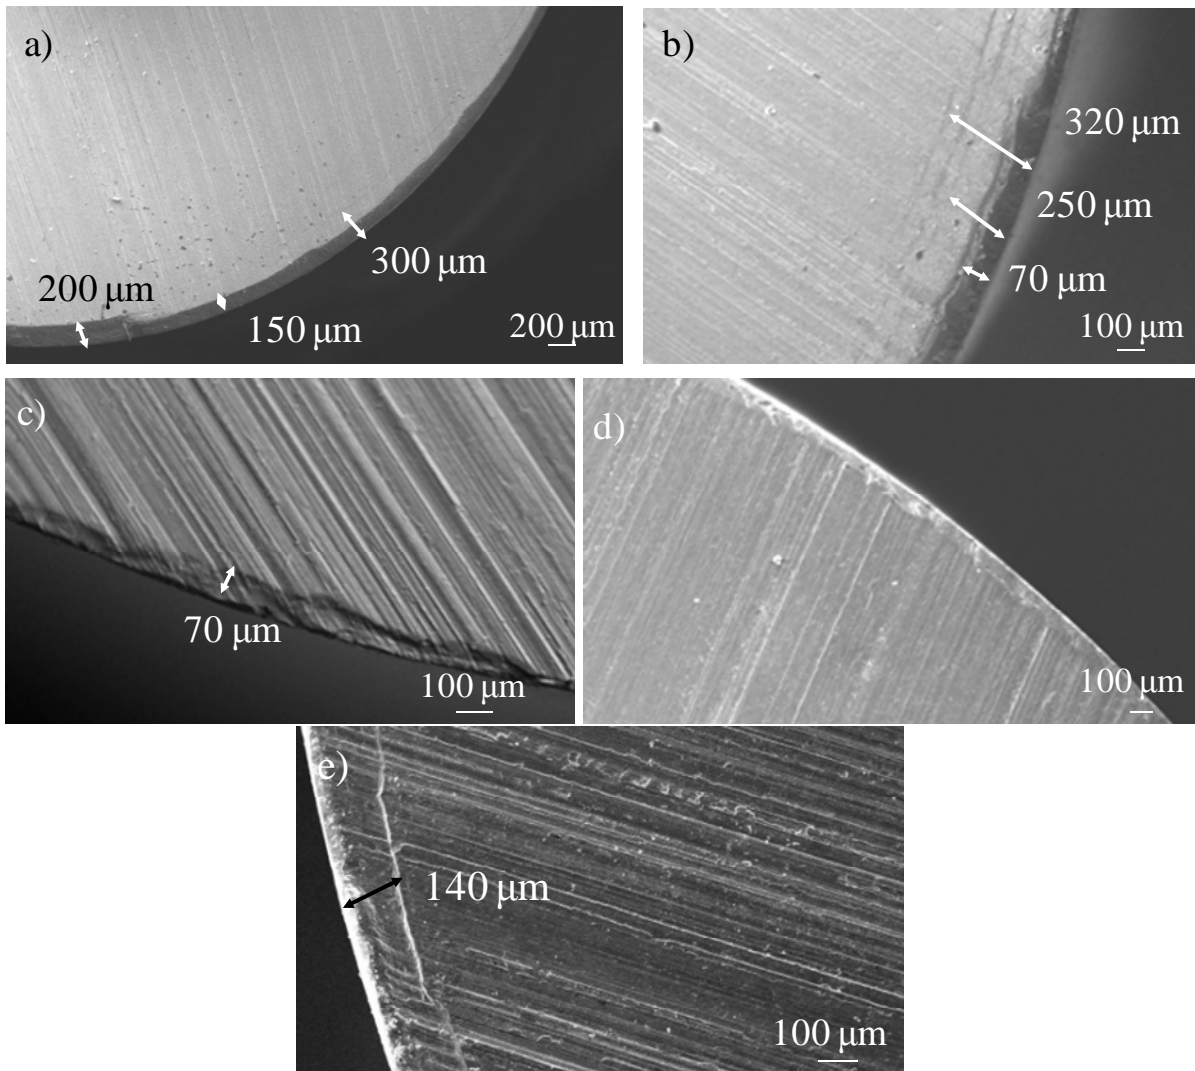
Fractography after 50 strokes: a) 1.2379A (fracture); b) 1.2379B (sinking); c) K360 (deformation and sinking); d) UNIVERSAL (-); e) HWS (deformation and sinking)
